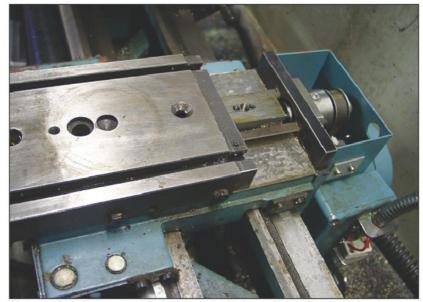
Switches mounted on lathe, note actuating rod is not fitted.
